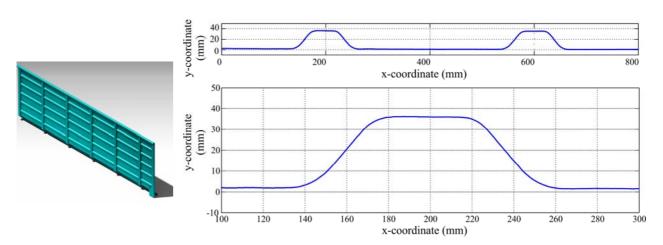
3d CAD model of huge size container lateral side and an example of scanned profile geometry of ribbed sheet metal filling; Scanning is carried out in laboratory conditions in CeNT
